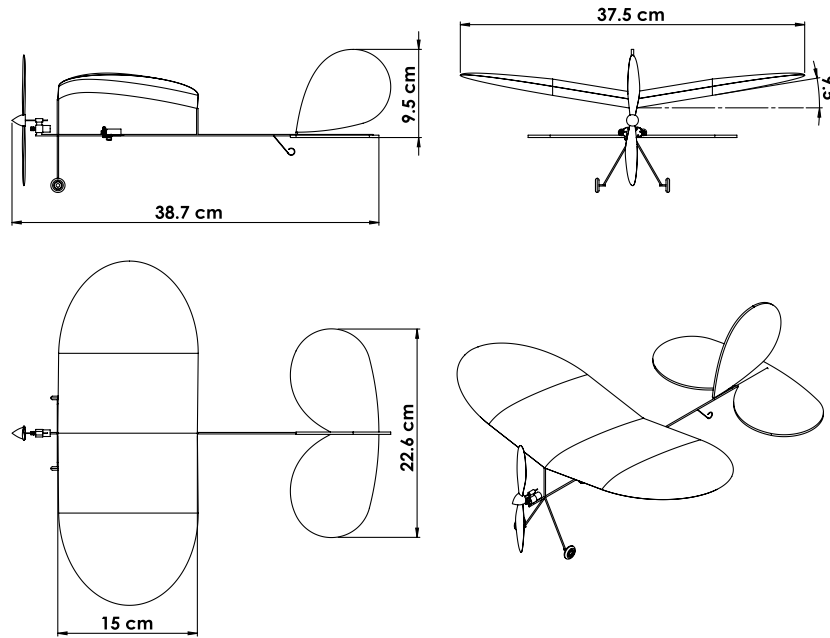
A three-view drawing showing the geometry of the test aircraft.
